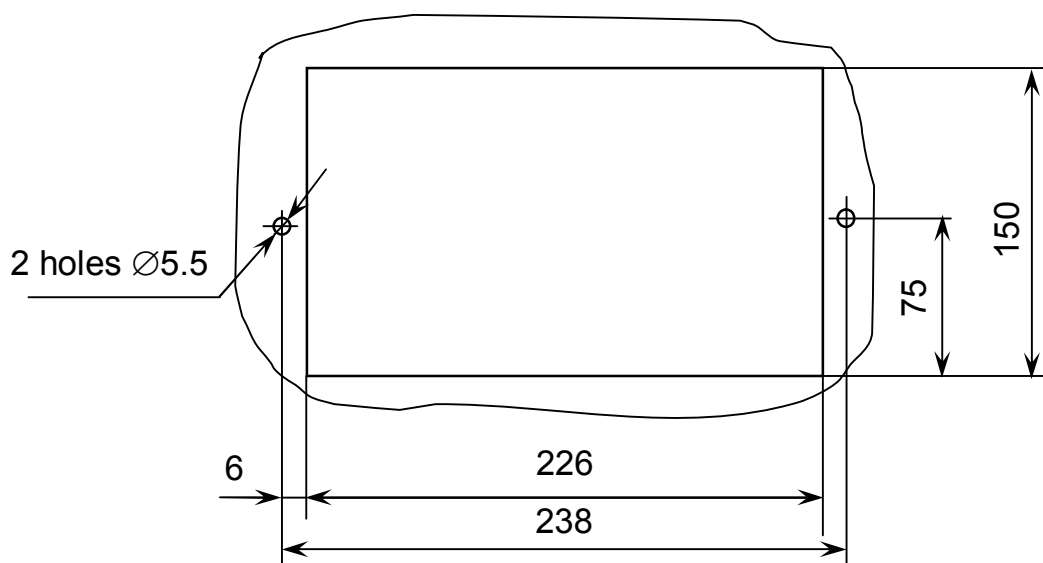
Layout of attachment holes for a panel-mounted converting unit
